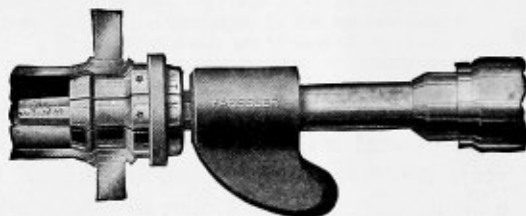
HAMMER PLACED TO EXPAND THE TUBE
